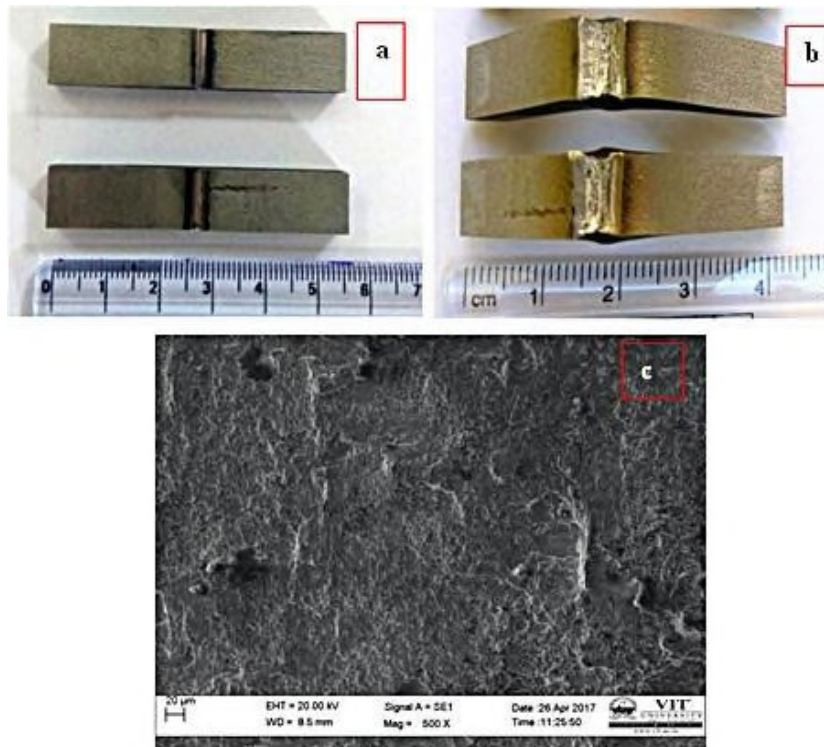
(a) Laser-welded tensile testing samples; (b) the samples after the tensile test; (c) SEM fractograph of the tensile sample.
